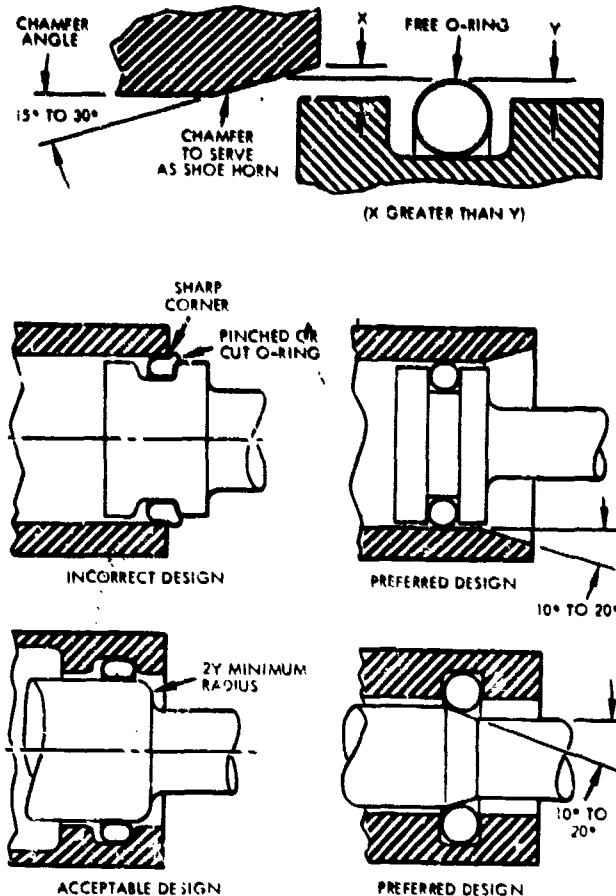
Typical Static O-Ring Gland Designs
